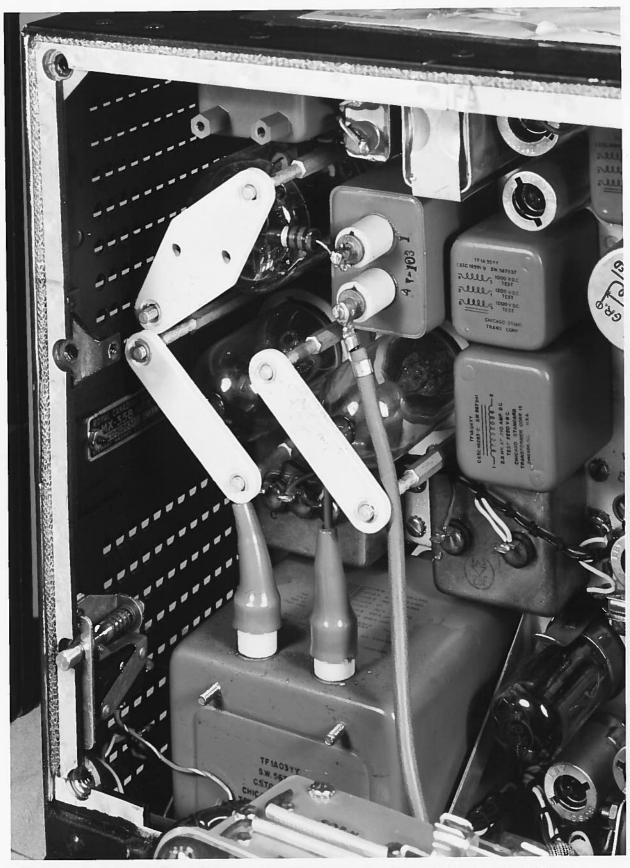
REVISED LAYOUT OF HIGH VOLTAGE WIRING (front of chassis) WITH 100-OHM RESISTOR INSTALLED
